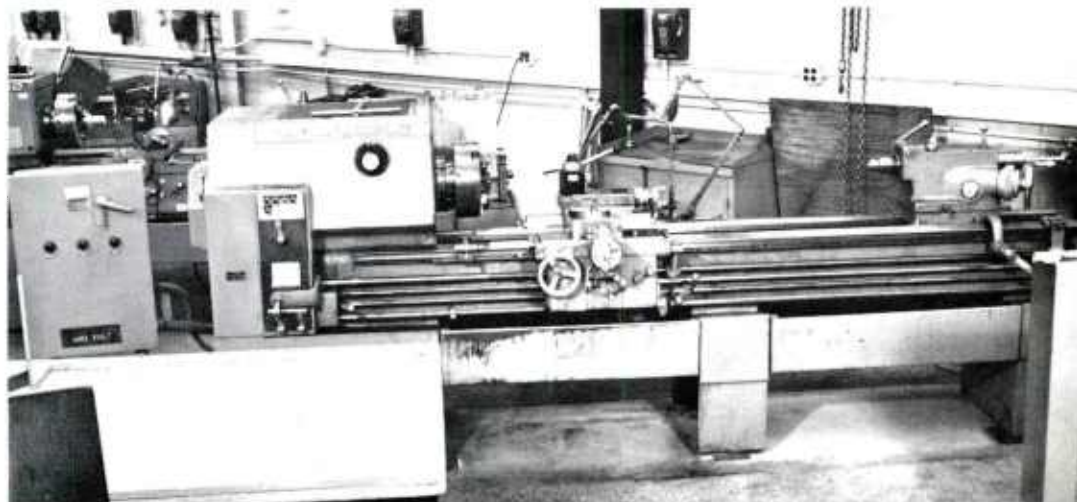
7-Horsepower, 16-inch-swing LeBlond tool and diemaker lathe.
